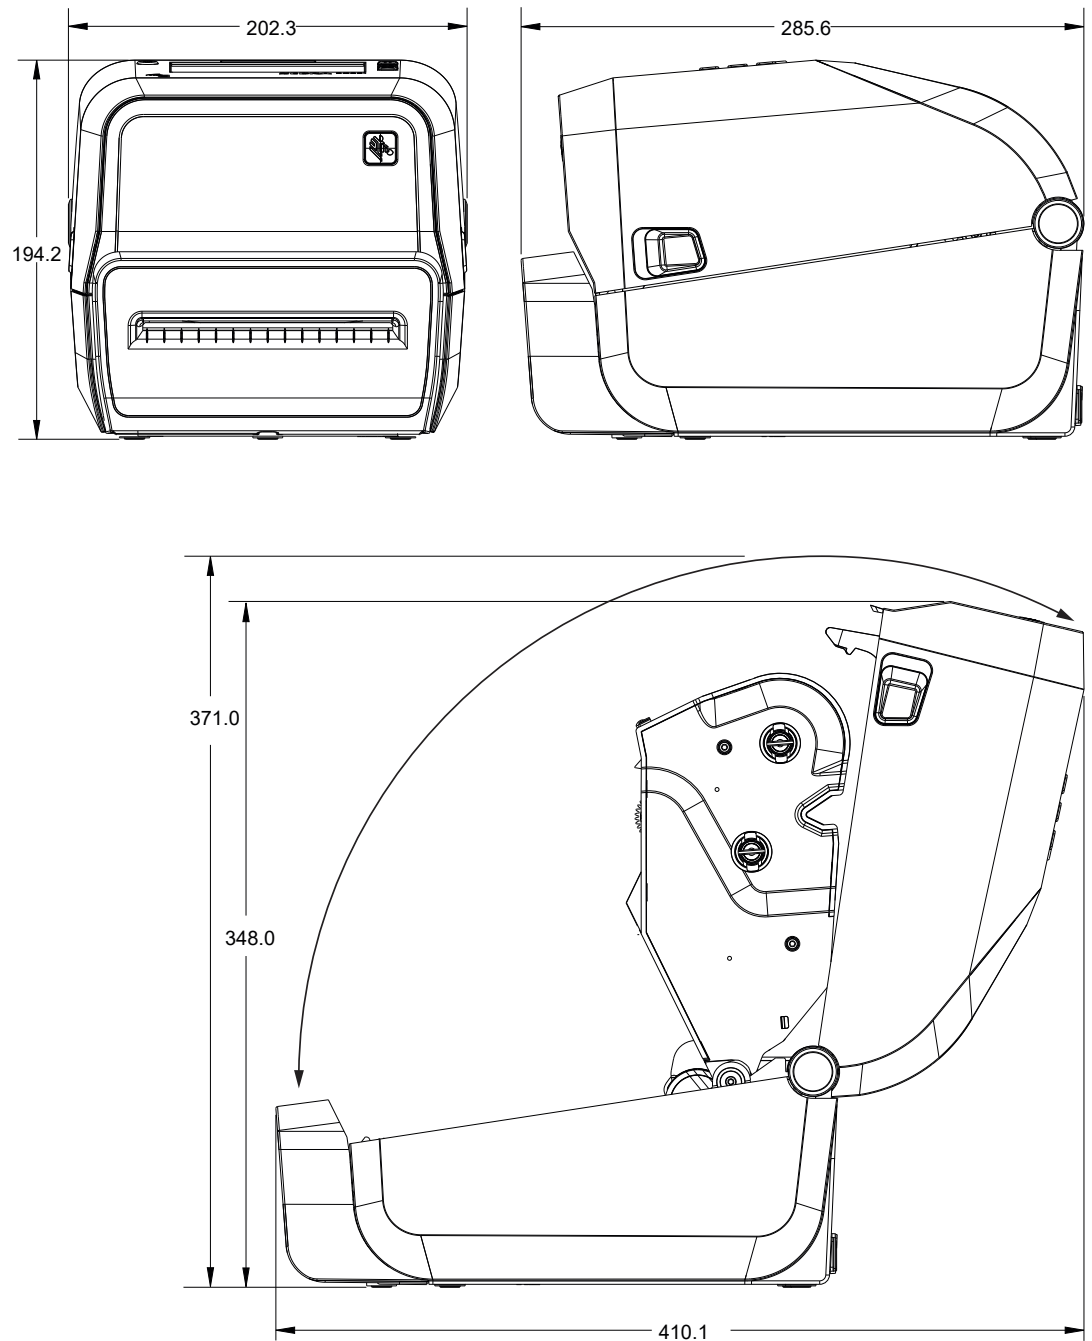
ZD621 / ZD421 Thermal Transfer Models – Dimensions for Printer with the Label Dispenser Option Installed
